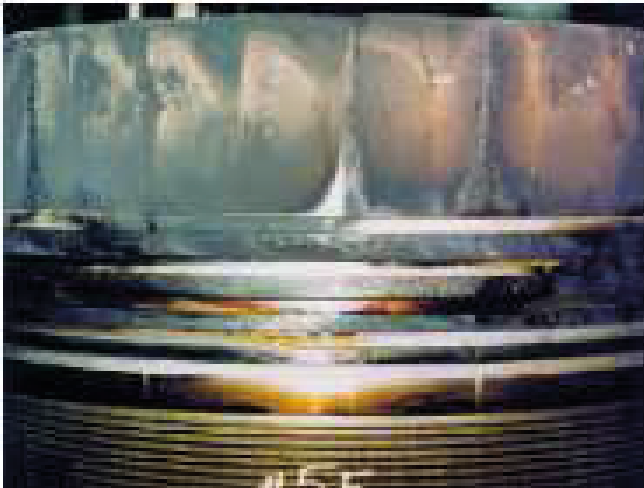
View of damaged side surface of a piston due to its seizure in cylinder liner and breaking of sealing rings. [8, 23, 25]
